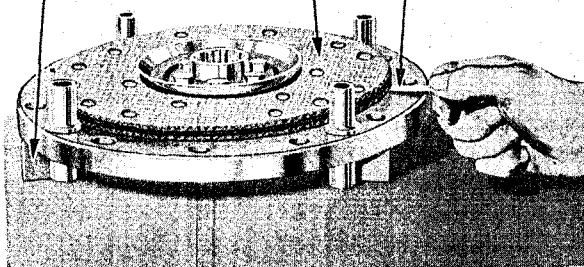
Measuring Clearance Between Clutch Facing and Center Driving Plate
